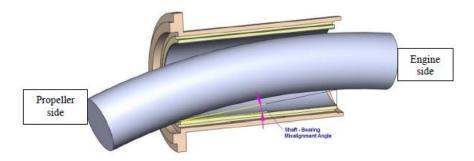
Aft stern tube bearing misalignment, ABS [12]
